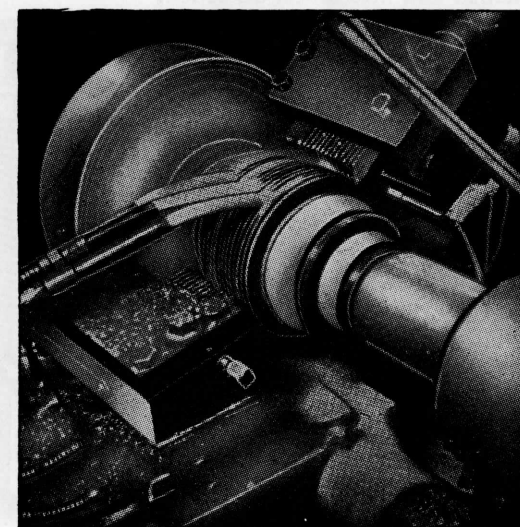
Machining of fins of an air-cooled engine cylinder.
